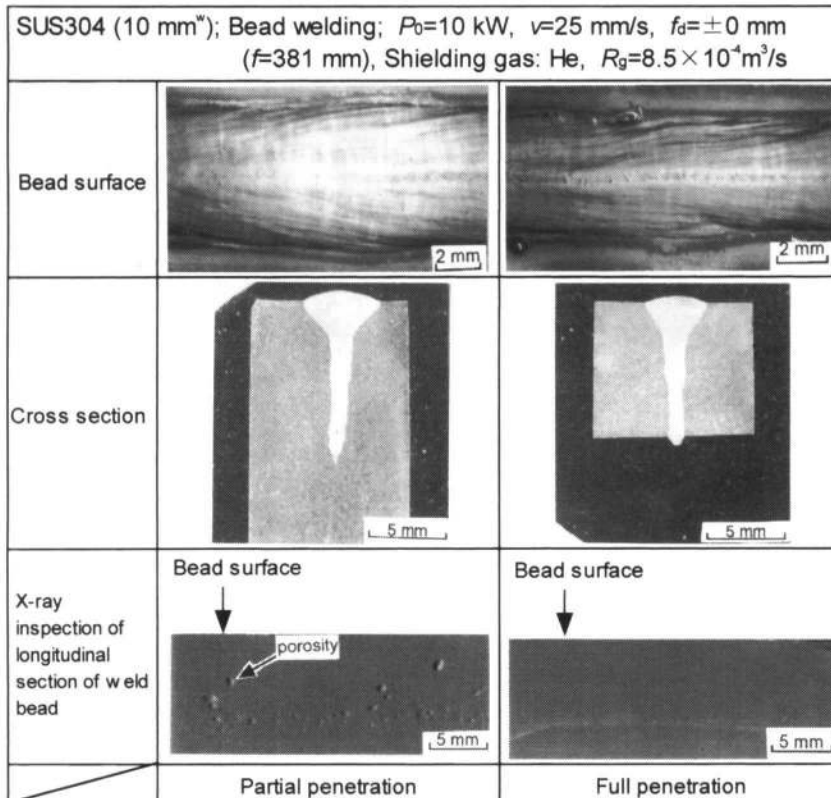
Comparison of bead surface, cross section and X-ray inspection photos between partially and fully penetrated weld beads of stainless steel.
